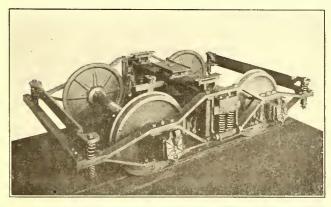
ARCH BAR TYPE OF MOTOR FREIGHT TRUCK; CENTER PIN LOAD, 22,000 LB.; WHEEL BASE, 60 IN.
